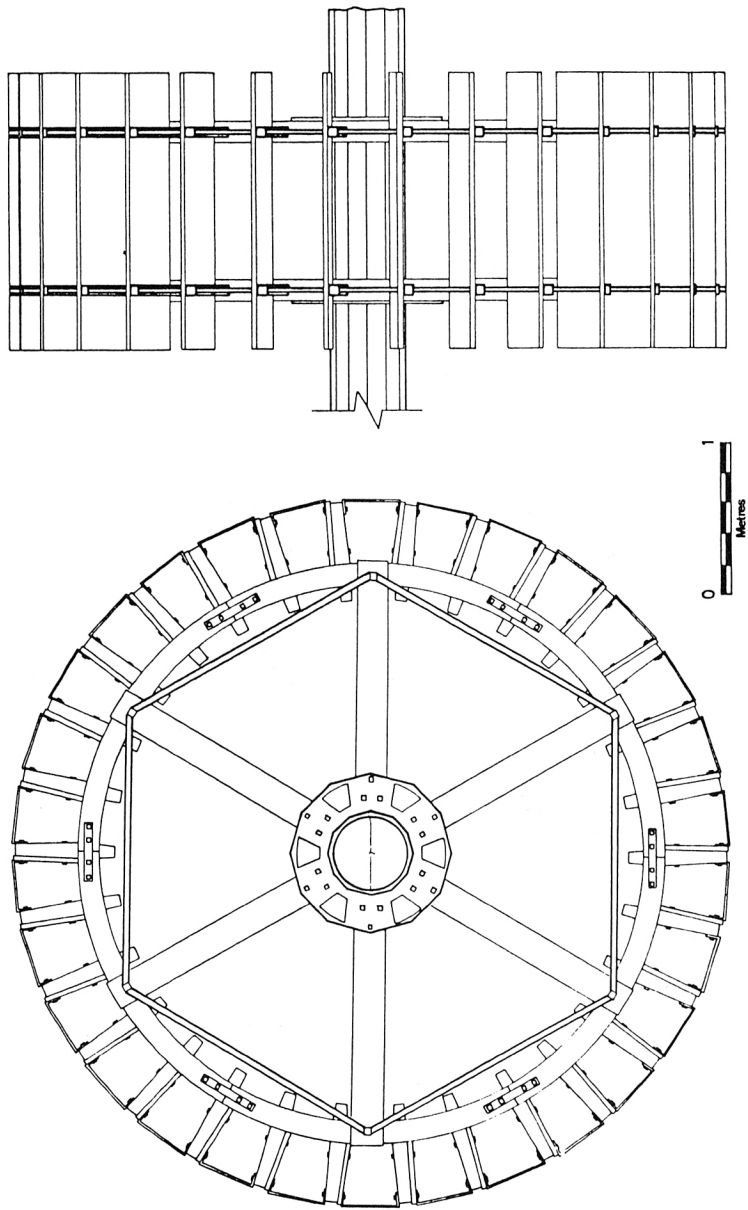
Boughrood Mill. Detailed drawing of wheel.
